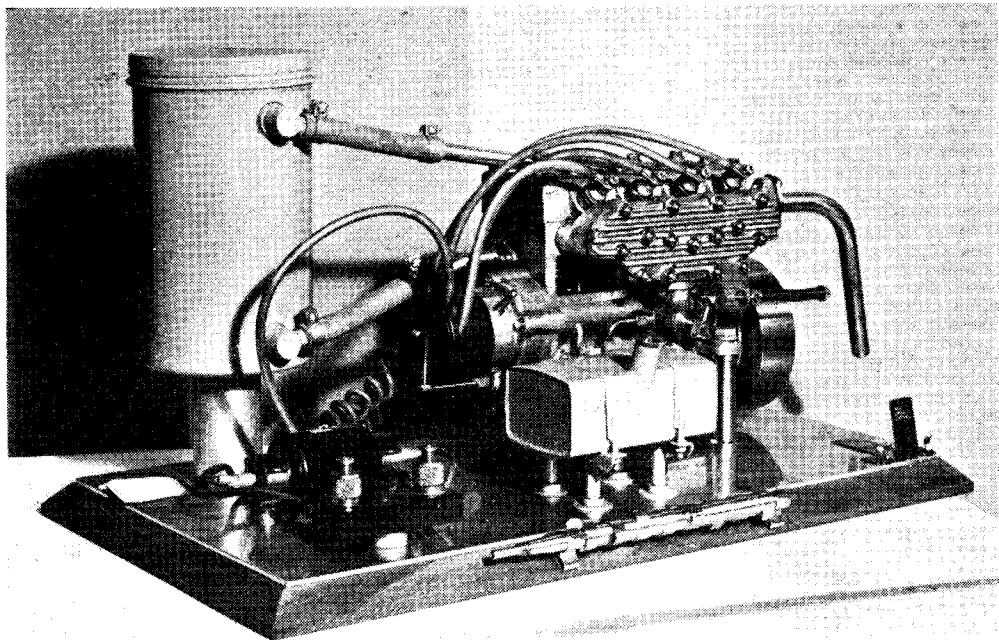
A 15-c.c. four-cylinder "Seal" engine built by A. B. Langley. The "spare" camshaft clipped to the front of the baseboard is actually one which refused to harden, so that a second had to be made
